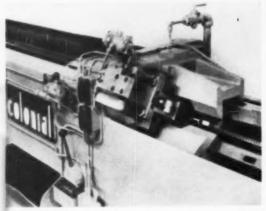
Colonial universal borizontal broaching machine equipped with shuttling fixture for triple-slotting clutch hubs of the type shown in Fig. 2
